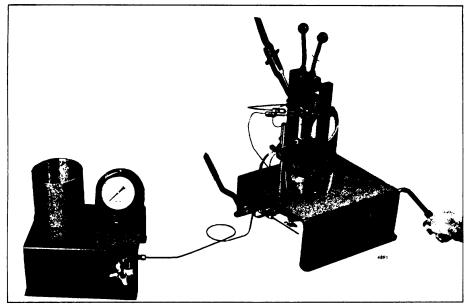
Injector Needle Valve Test with Auxiliary Tester J 22640
